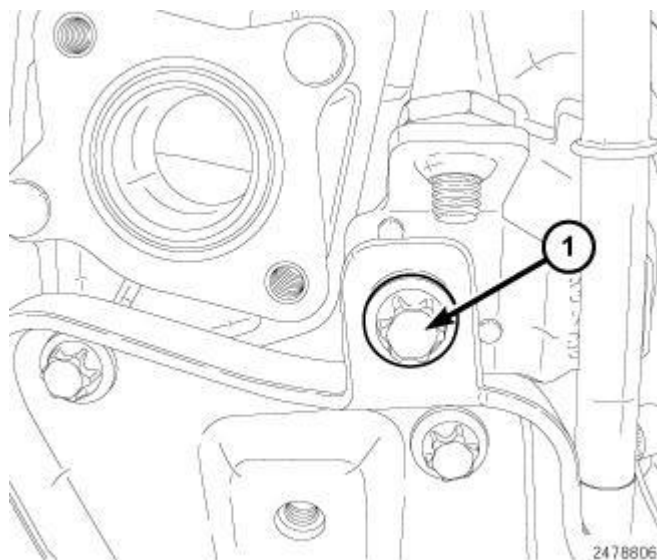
Upper EGR Cooler Bolt & Bracket
